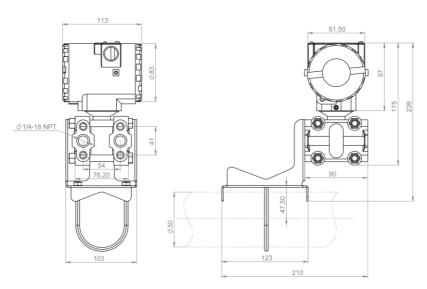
Mounting AMZ 5050 to a 2" pipe, angle bracket
